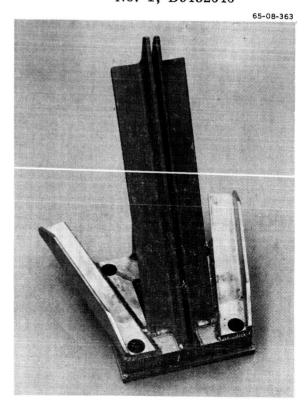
Bracket Mounting, SW. No. 3, J9432641
